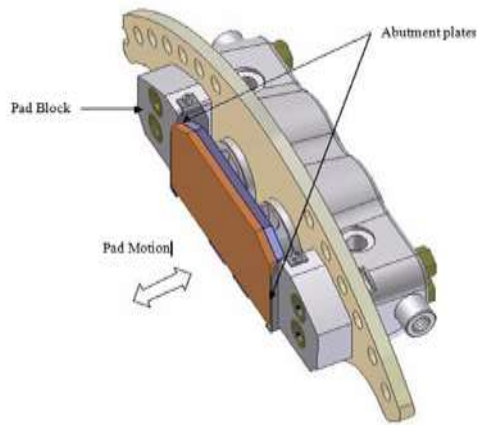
Details of abutment plates and pad-backing plate assembly
